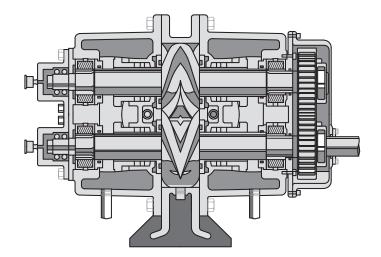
External gear rotary pump. Courtesy of Kinney Vacuum Company, Inc.
